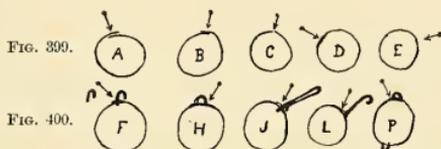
Showing (edgewise) the plain Bands before and after being Soldered.
